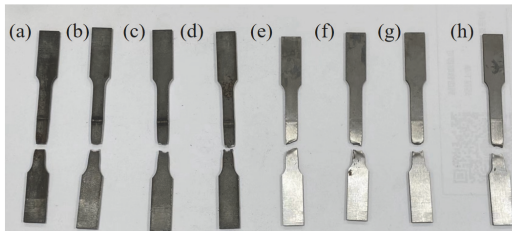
Tensile fracture position of welded samples: (a) - (d) 3 kW - 6 kW, before press hardening; (e) - (f) 3 kW - 6 kW, after press hardening.
